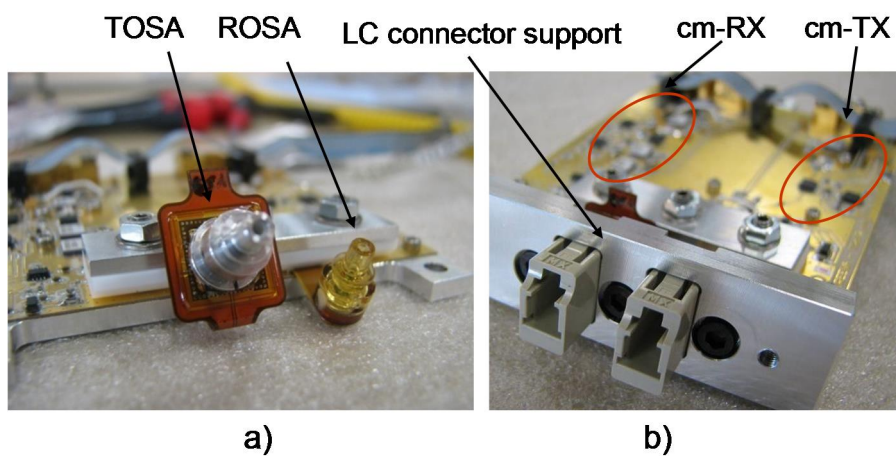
The centimeter-wave circuit board picture, from IETR ORIGIN partner: a) TOSA and ROSA integration into the cm circuit board; b) cm circuit PCB board
